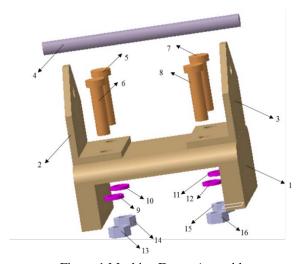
Machine Frame Assembly 1: Base 2 &3: L shaped frames 4: Rod 5, 6, 7&8: Bolts 9, 10, 11&12: Washers 13, 14, 15&16: Nuts
